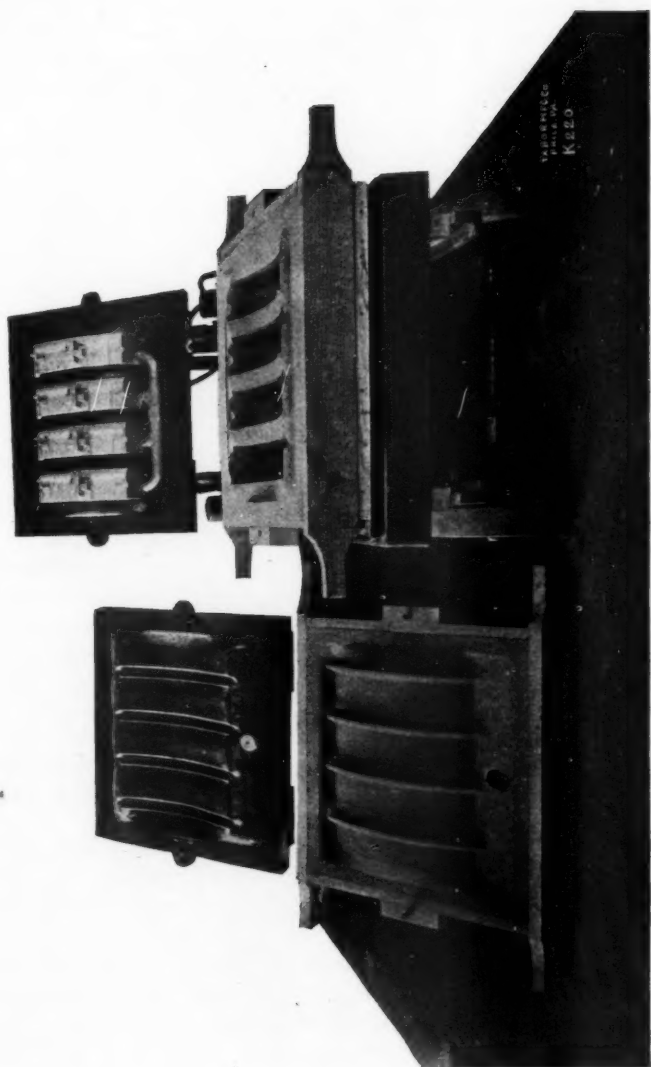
BRAKE SHOE ON TABOR ROLLOVER MACHINE.
